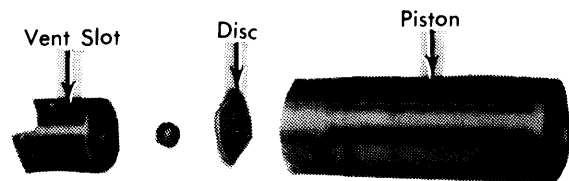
Exploded View of Timing Chain Tensioner Piston
